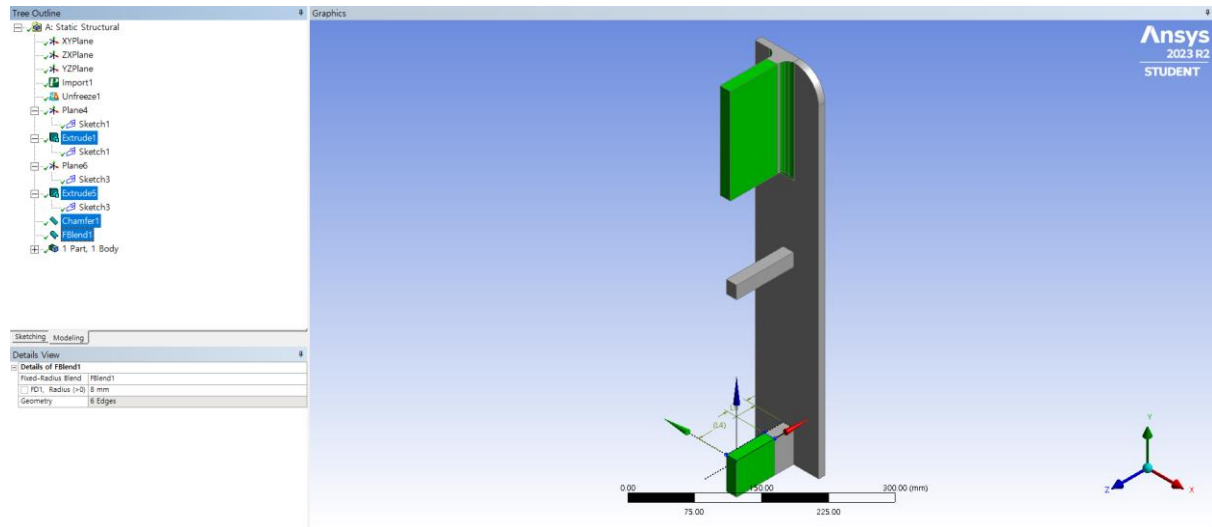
Making Imprinted Design, Chamfer and Blend in Geometry (Design Modeler)
